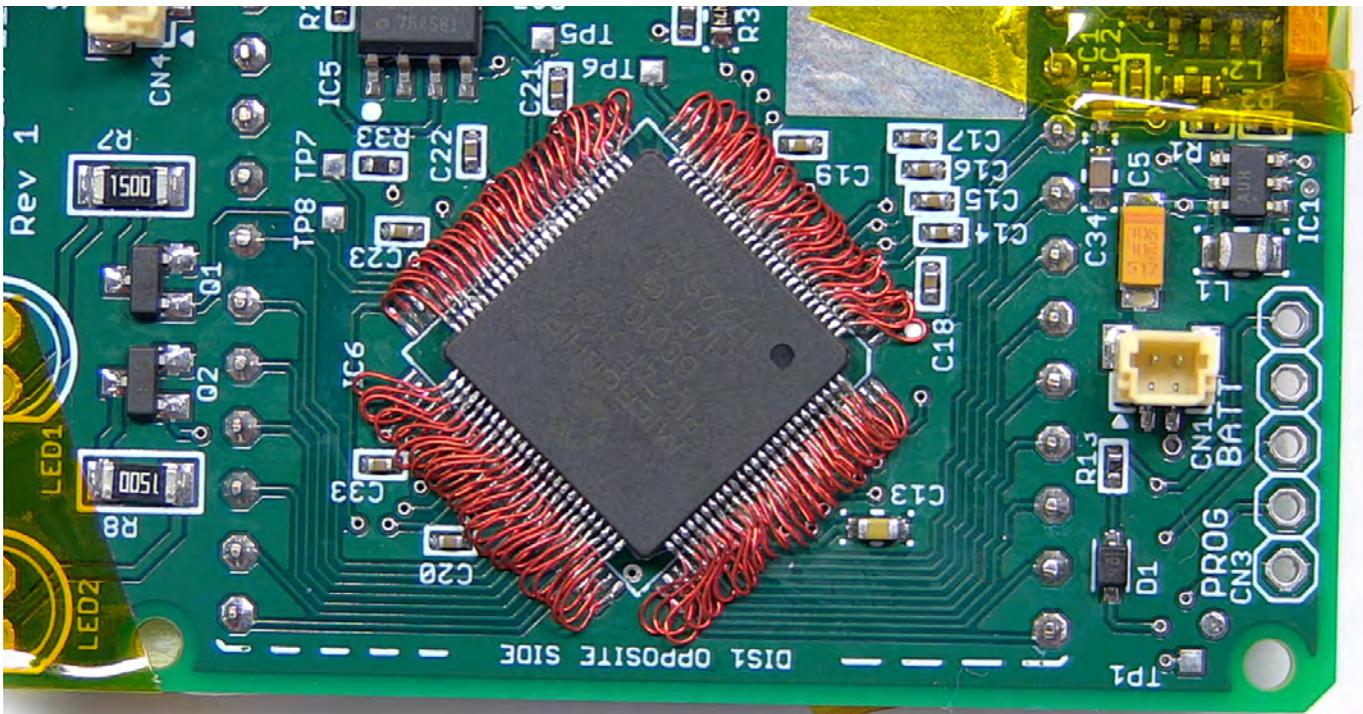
Dead bug attachment of QFP to different pads on a PCB due to a layout problem.
